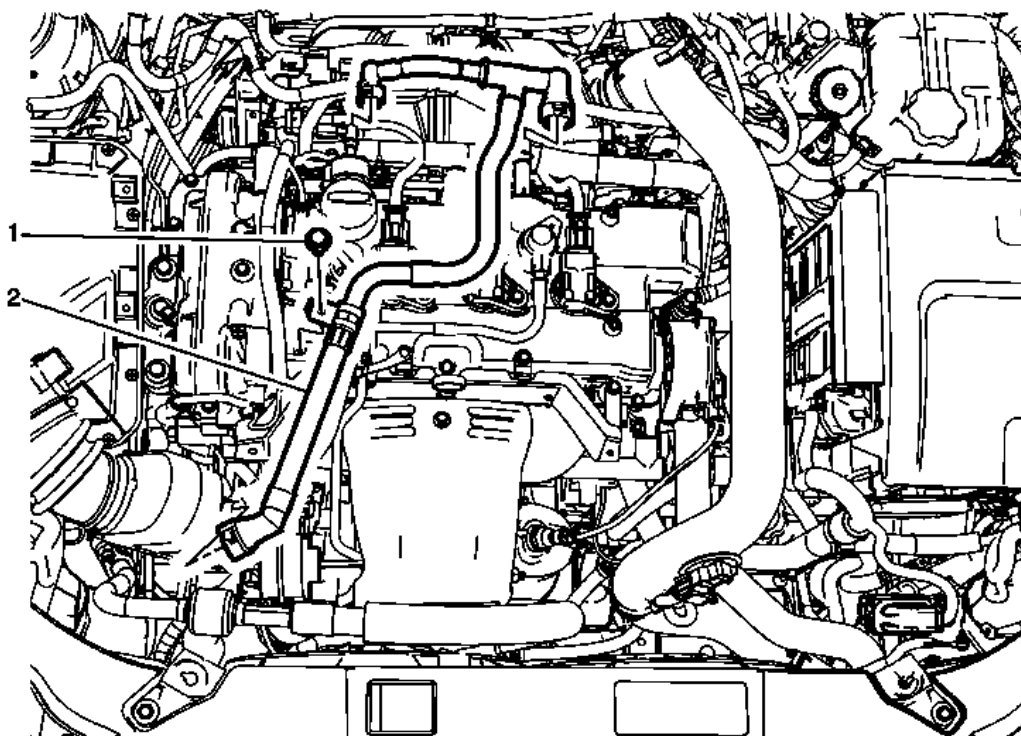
Positive Crankcase Ventilation Hose/Pipe/Tube (Camshaft Cover to Air Cleaner Resonator to Outlet Duct)
